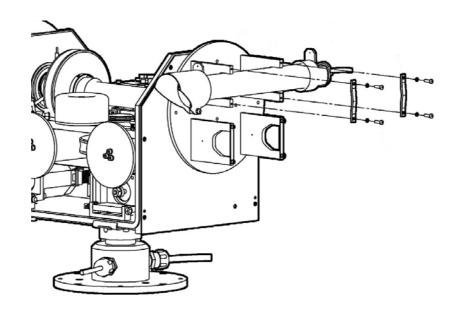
Kipp & Zonen 2 AP Solar Tracker fitted with optional Large Side Mounting Plate for mounting CH 1.
